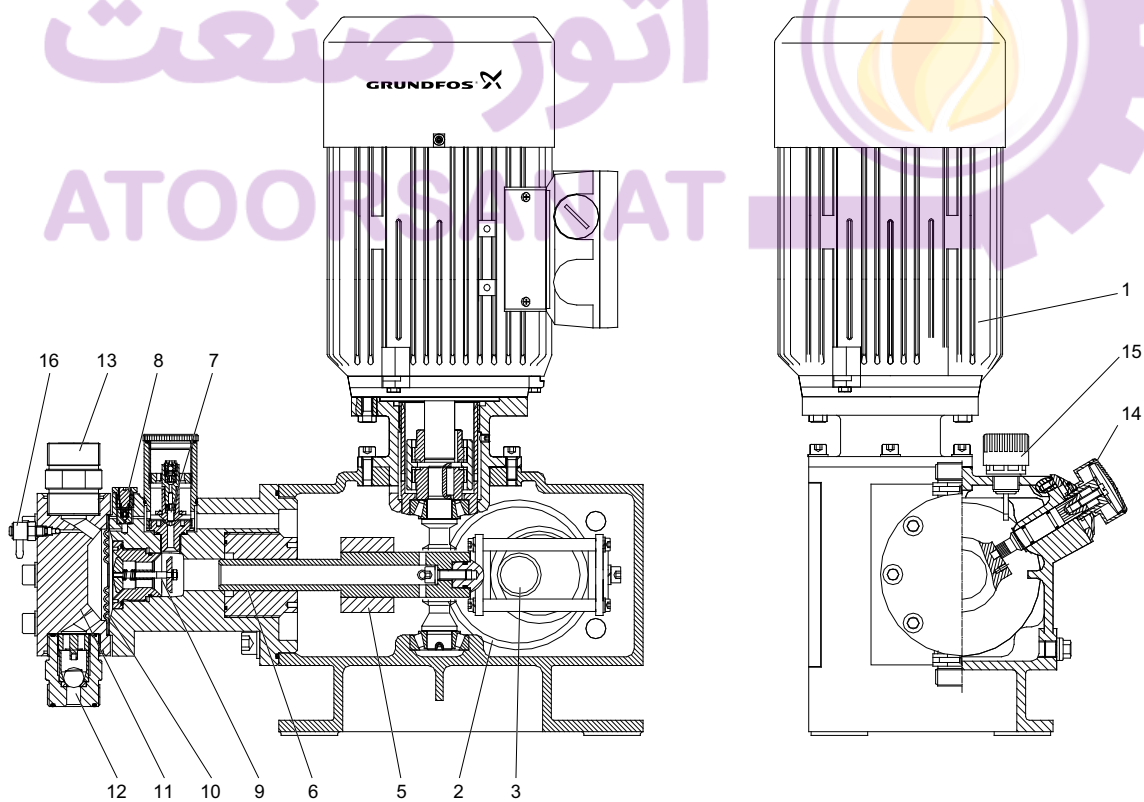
Sectional drawing, DMH models 285, 286, 287
